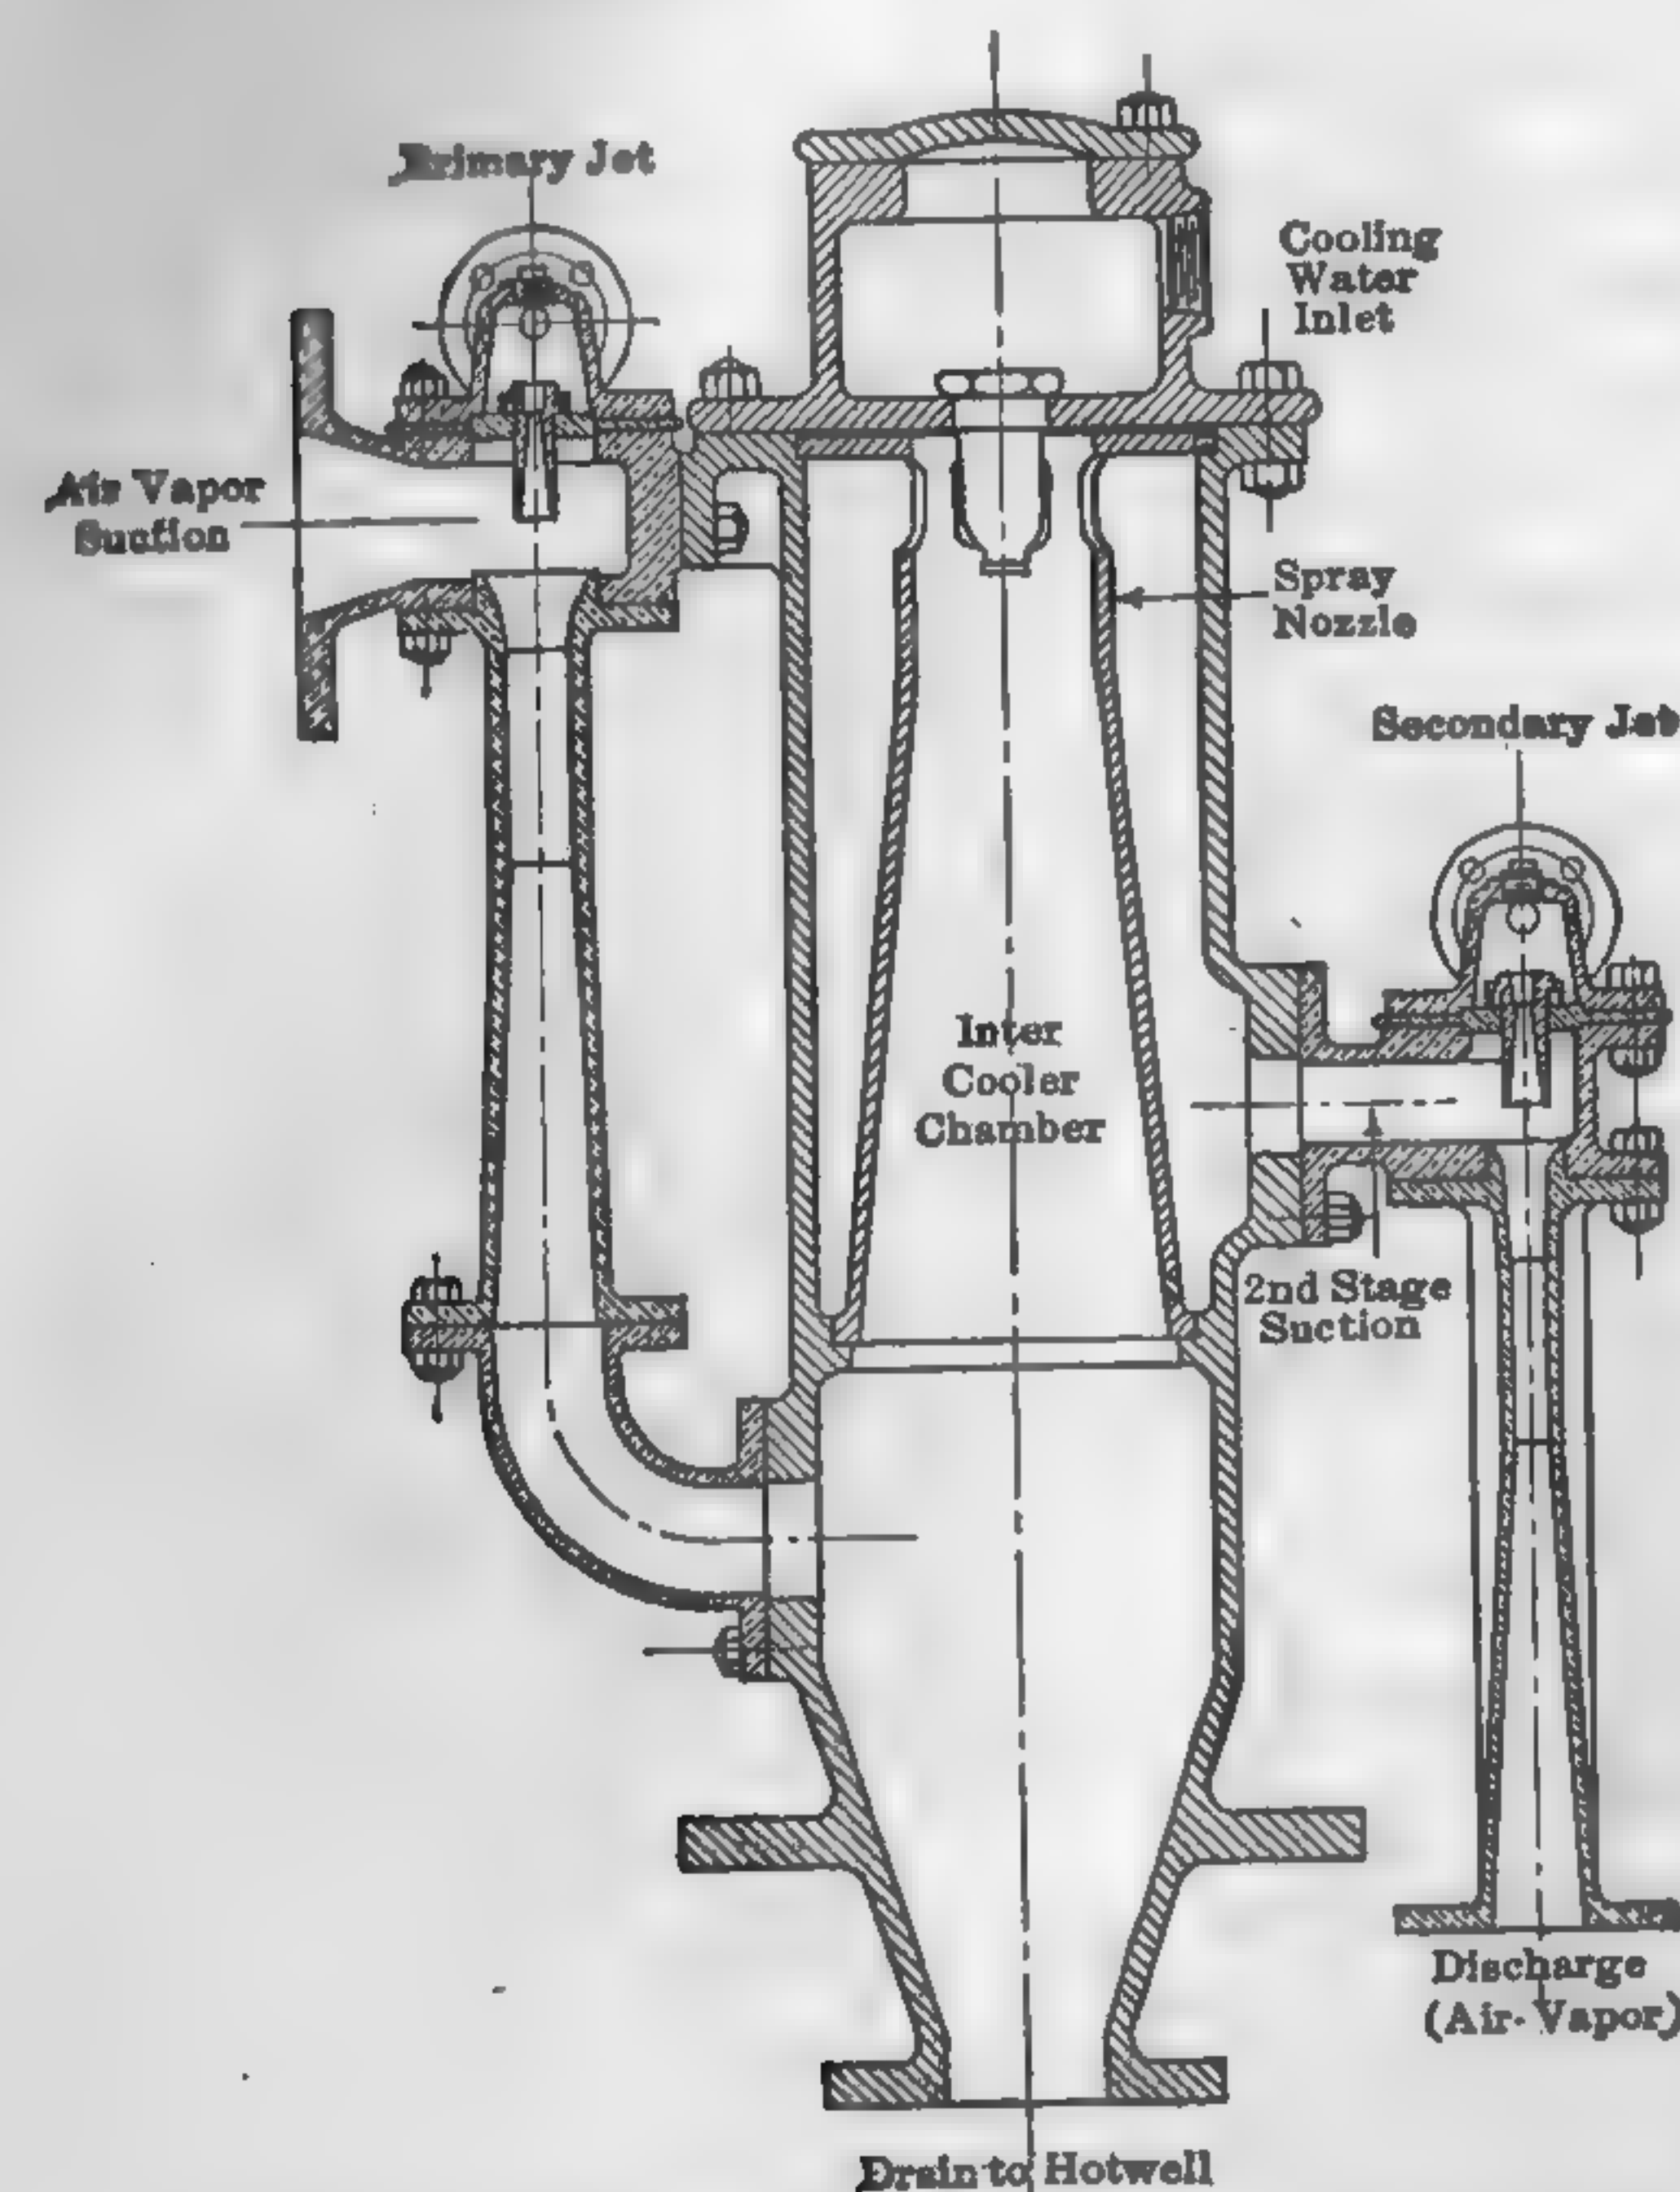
Westinghouse Steam-jet Air Pump (Jet Inter-cooler Type).
